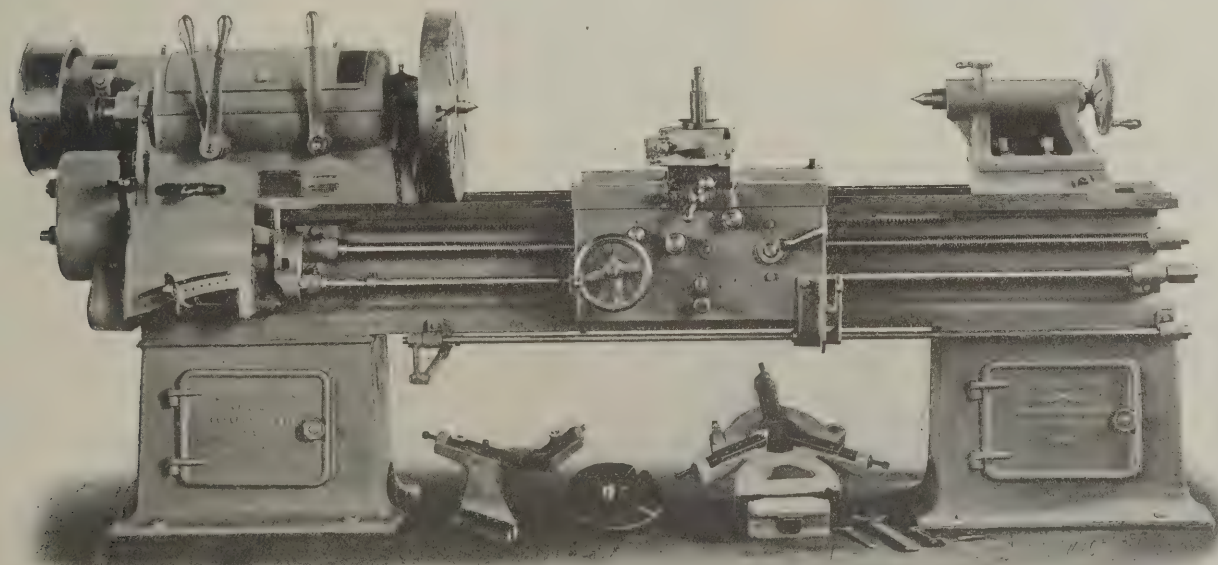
Reed-Prentice 20-inch Geared-head Lathe
